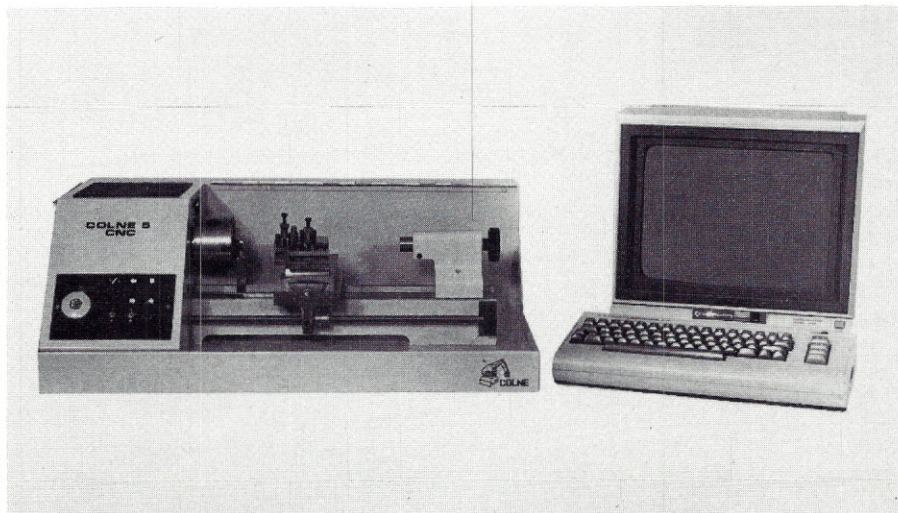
Colne Robotics/D&M Computing 5 CNC lathe.
